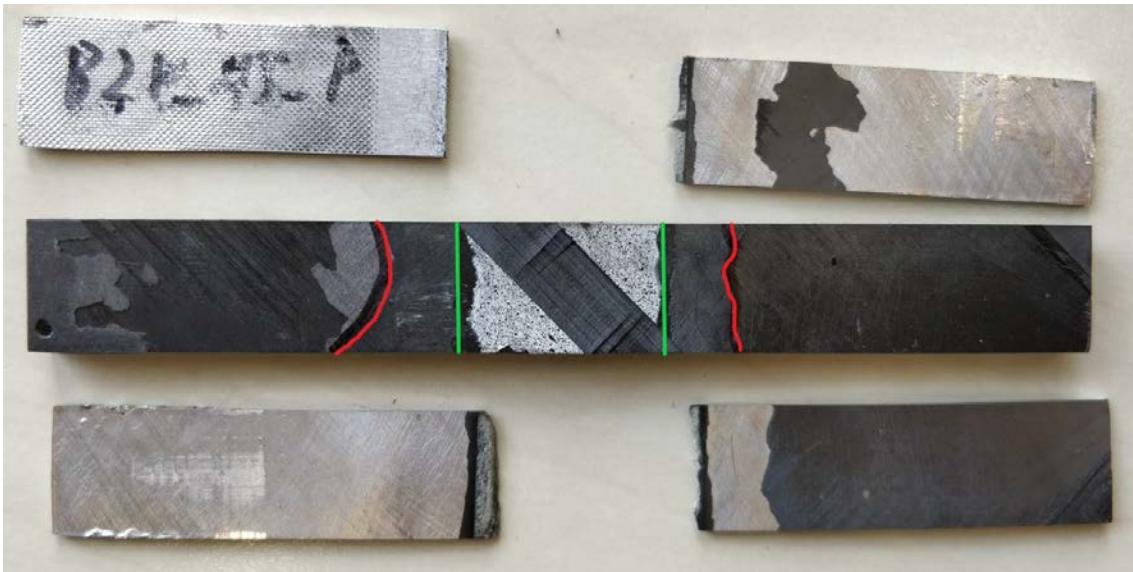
Tabs debonding surface after failure of "B23" specimen
